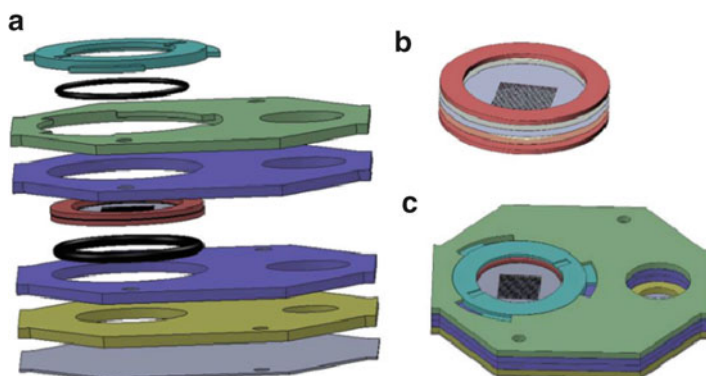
Biomimetic membrane formation chamber in an exploded view (a), and as a complete assembly (c) with clamp (blue) and PaR (b)
